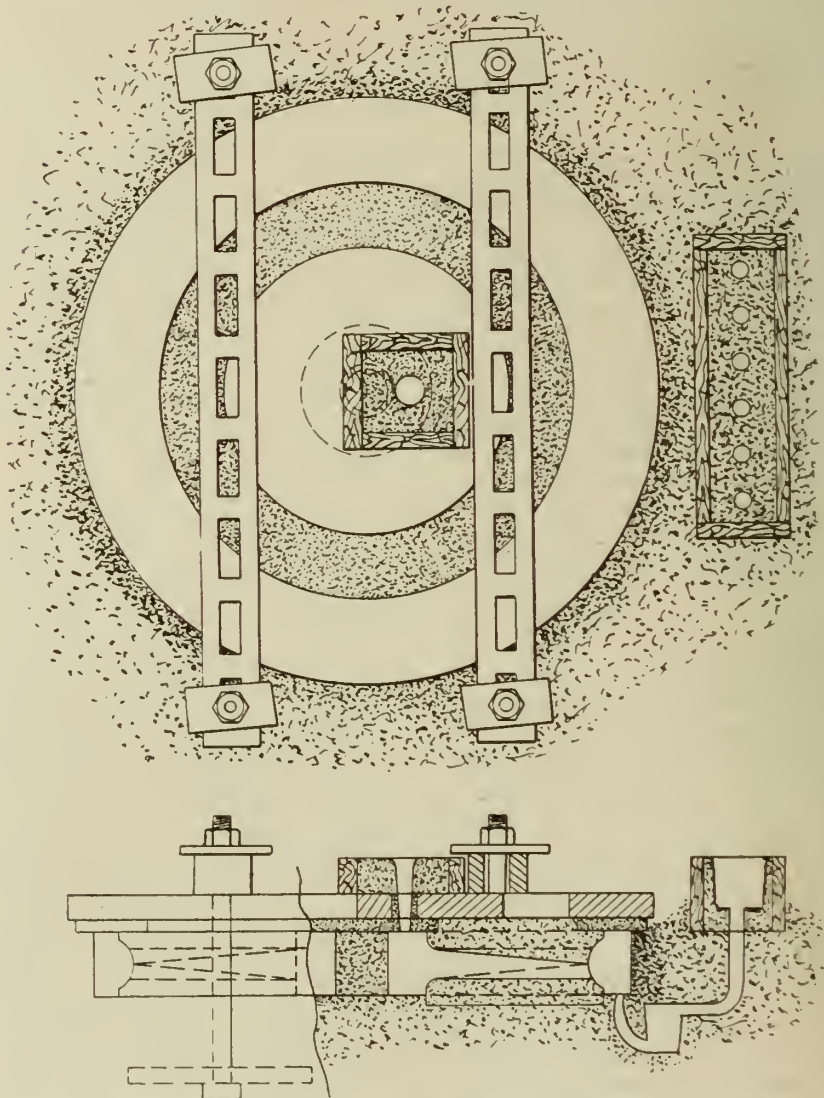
SHOWING TOP AND SIDE VIEW OF MOLD WHEN COMPLETED.
